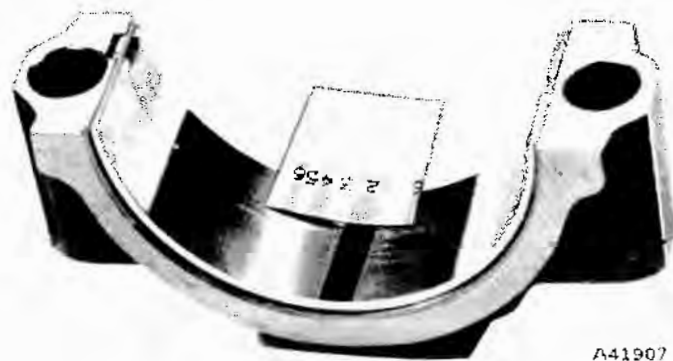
B-31 Connecting Rod Bearing Clearance Measurement With Plastigage
